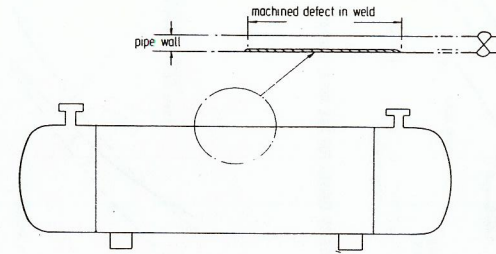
SCHEMATIC OF TEST VESSEL WITH SEAM WELD DEFECT
